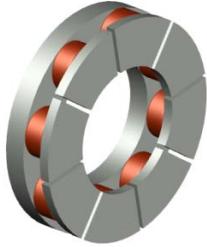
8-pole stator of disc-type machine with concentric coils
